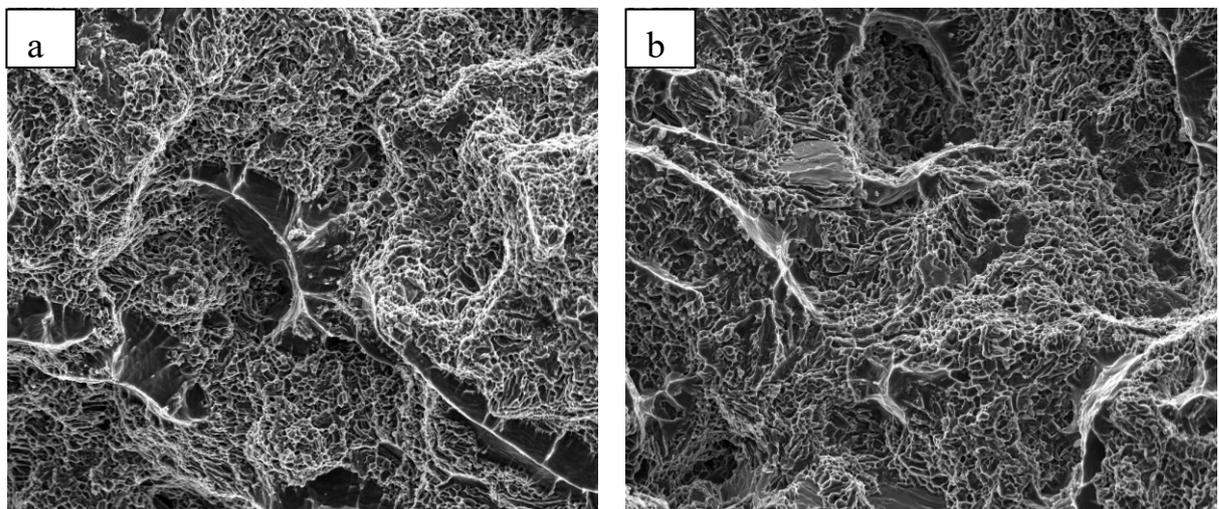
SEM fractographs of the T6-treated tensile specimens: (A) alloy A, and (B) alloy B (Zr-containing).
